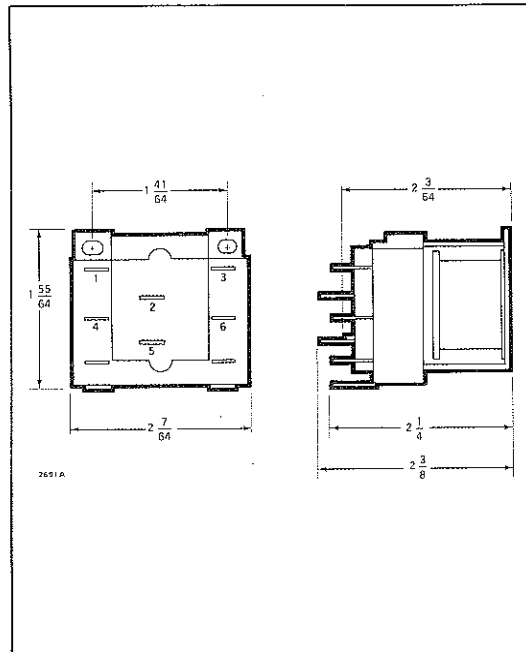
Dimensions of the R4228 and R8228 Relay.
